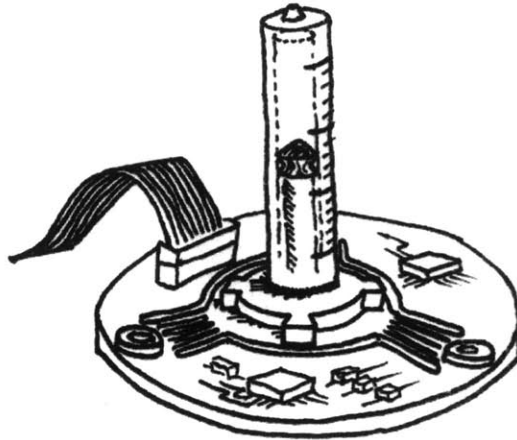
This sketch shows a preliminary integrated PCB force sensor concept with ampoule mounted.
